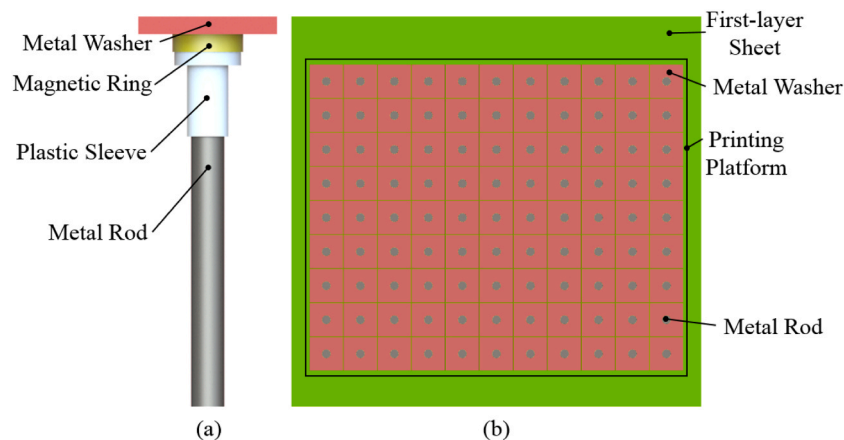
The detailed structure of a metal pin structure and the first-layer sheet. (a) The design of the metal pin structure; and (b) the printing platform using a set of reusable metal pins (a total of 11×9 metal pins are used in the design).
